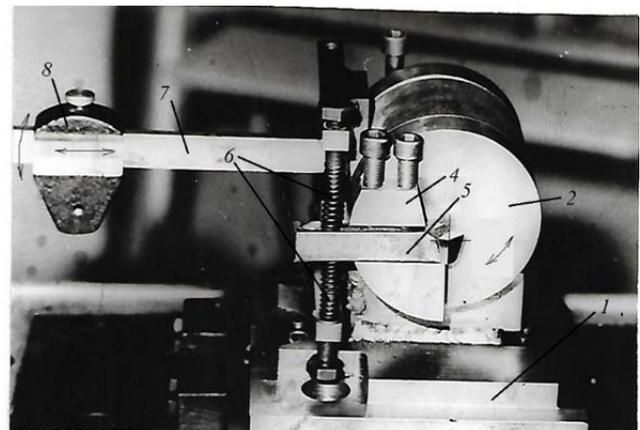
Fixture with movable turning tool – design 2; 1 – stand, 2 – pin with movable face disc, 3 – roller bearings, 4 – clamp, 5 – turning tool, 6 – springs, 7 – rod, 8 – movable weights balance
